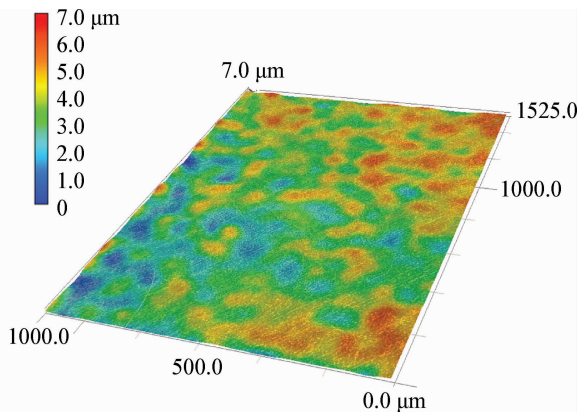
Hardened-layer on surface of a specimen after burnishing
